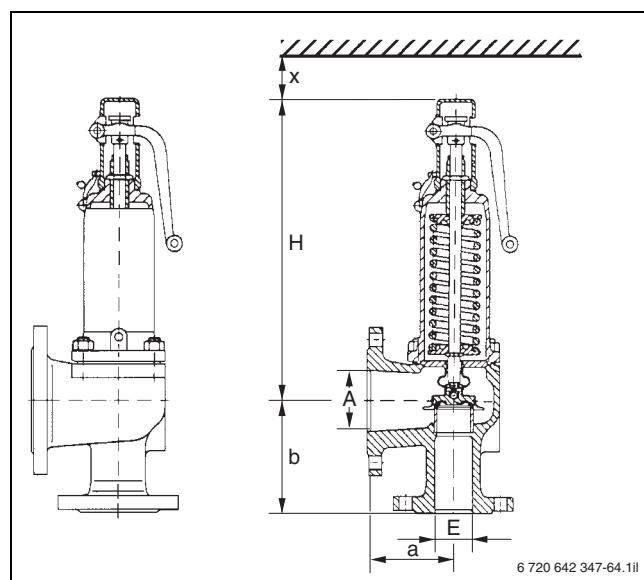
Safety valve for heating systems with UNIMAT UT-L boiler
